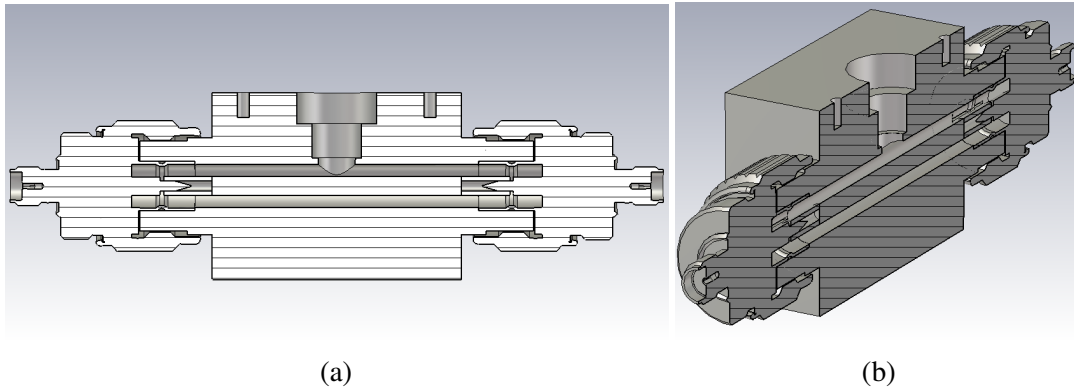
Three ports test fixture (3PTF): (a) cut view, (b) 3D cut view.
